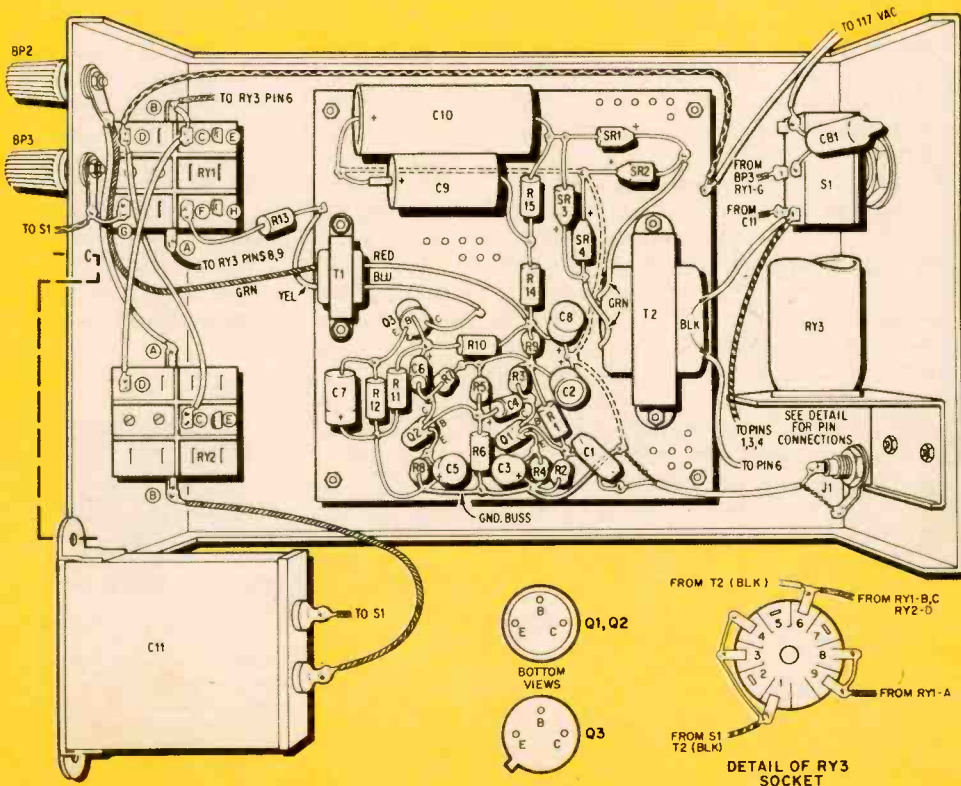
Start construction by mounting all the cabinet components. L-bracket at the lower right supports 9-pin tube socket for delay relay RY3.
